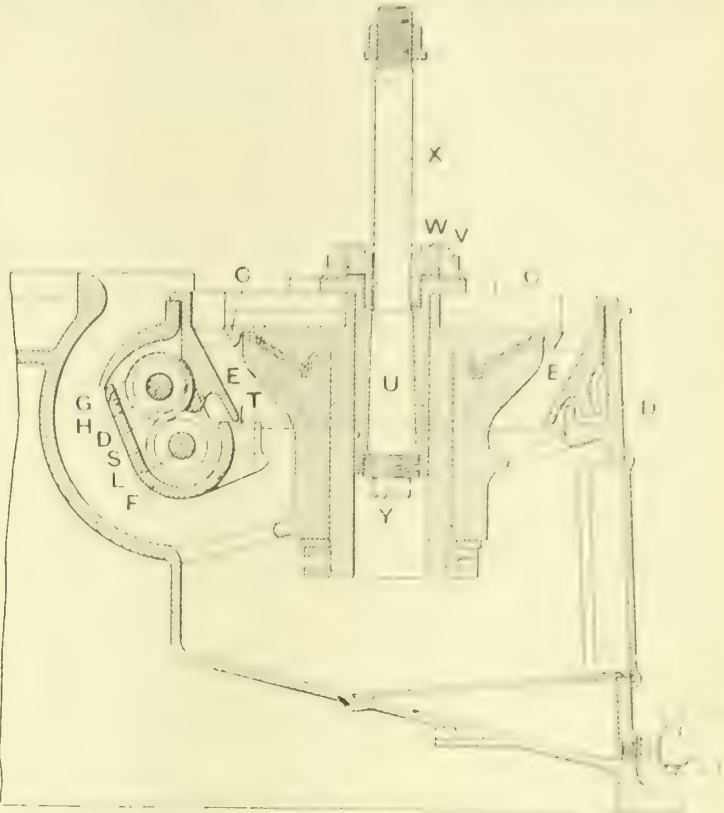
BROWN'S WORM WHEEL GENERATING MACHINE.
